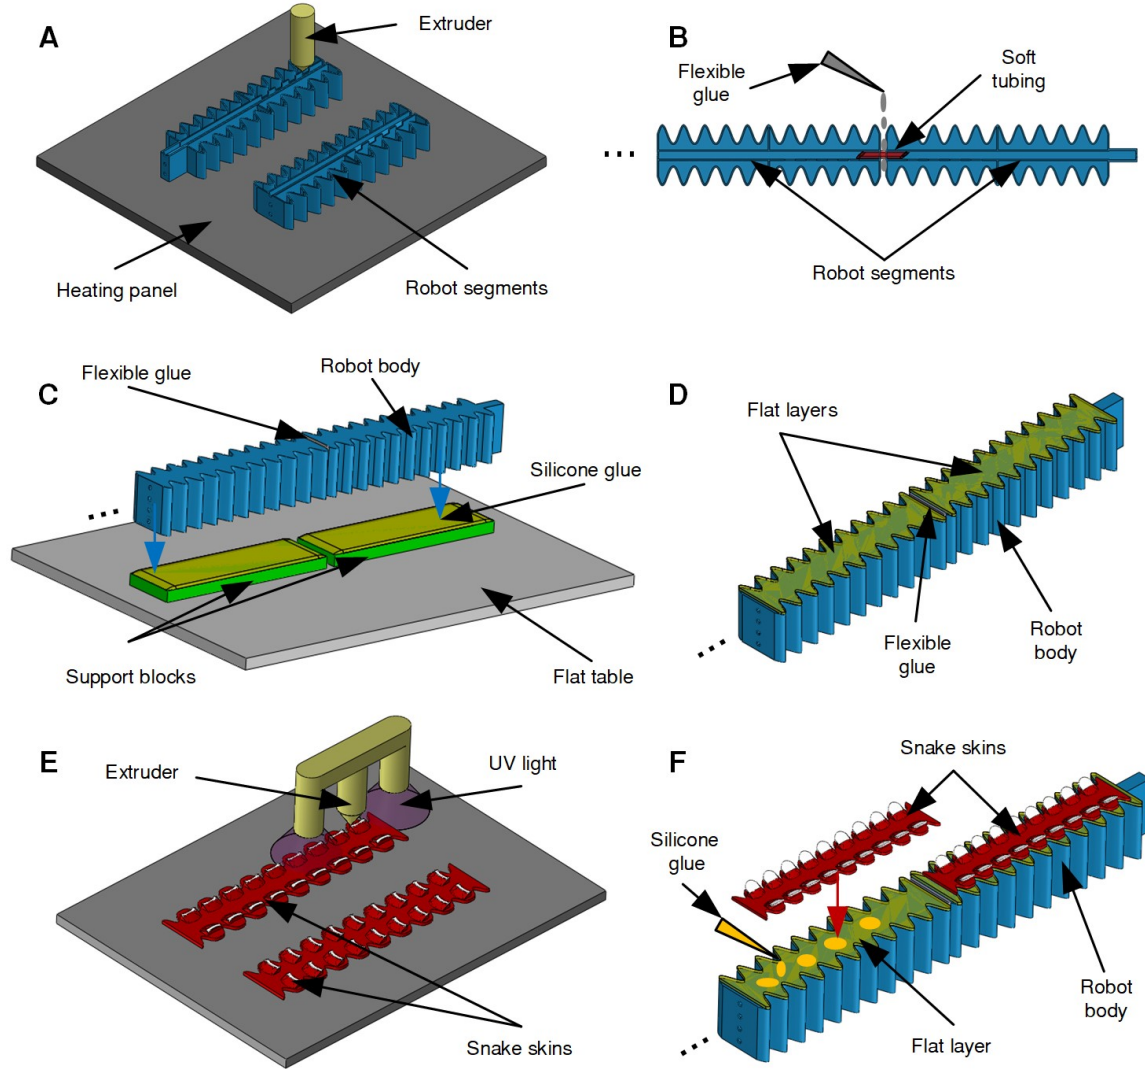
Fabrication method and materials for the snake robot prototype. (A) 3D-printing of the segments of the soft snake robot body. (B), Assembling of the soft snake robot body by using soft tubing and flexible glue. (C), Using flat surfaces and silicone glue to build a flat snake ventral surface. (D), The cured silicone glue forming a flat snake ventral surface after the support blocks are removed. (E), 3D-printing of different types of snakeskins. (F), Adhering snakeskins to the soft snake robot body with a flat ventral surface by using silicone glue.
